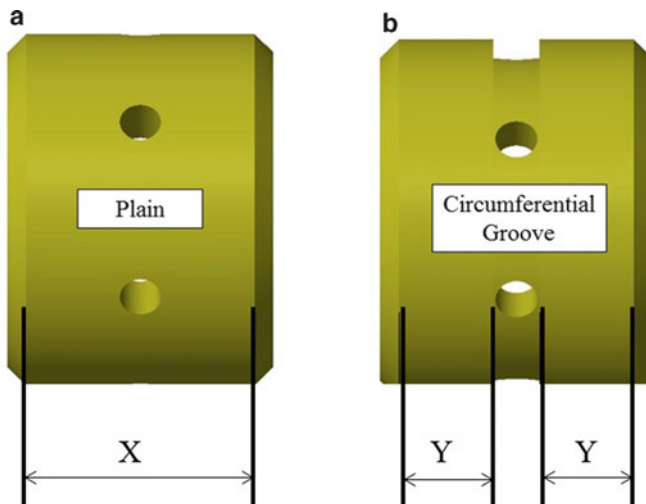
Effective outer bearing width [13]. a plain journal bearing and b circumferential groove bearing
